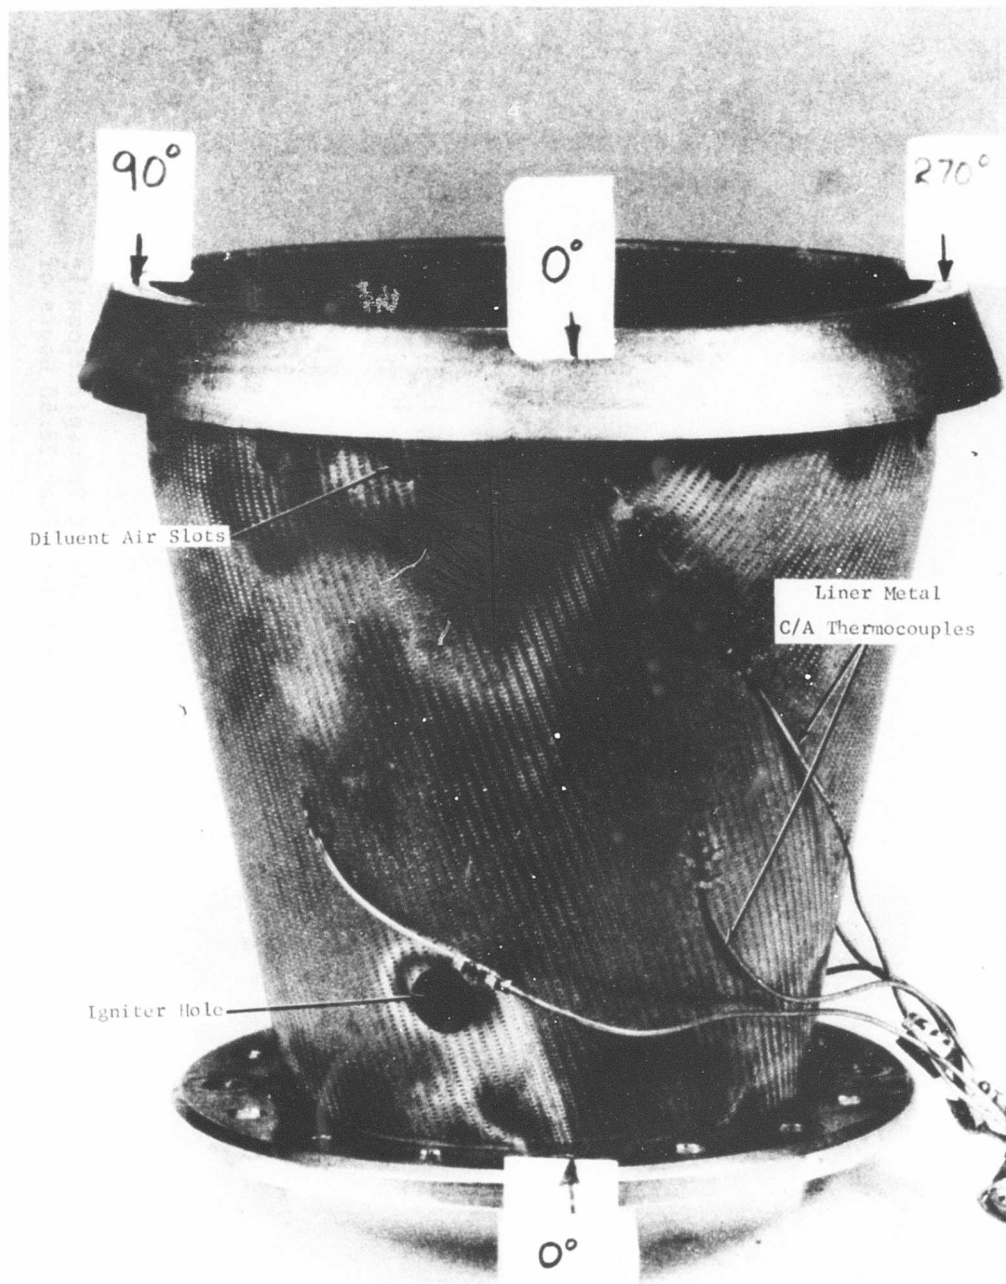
Post-Test Photograph of Cold Side of Transpirationally Cooled Outer Liner After 53:40 Hours of Hot Testing.
